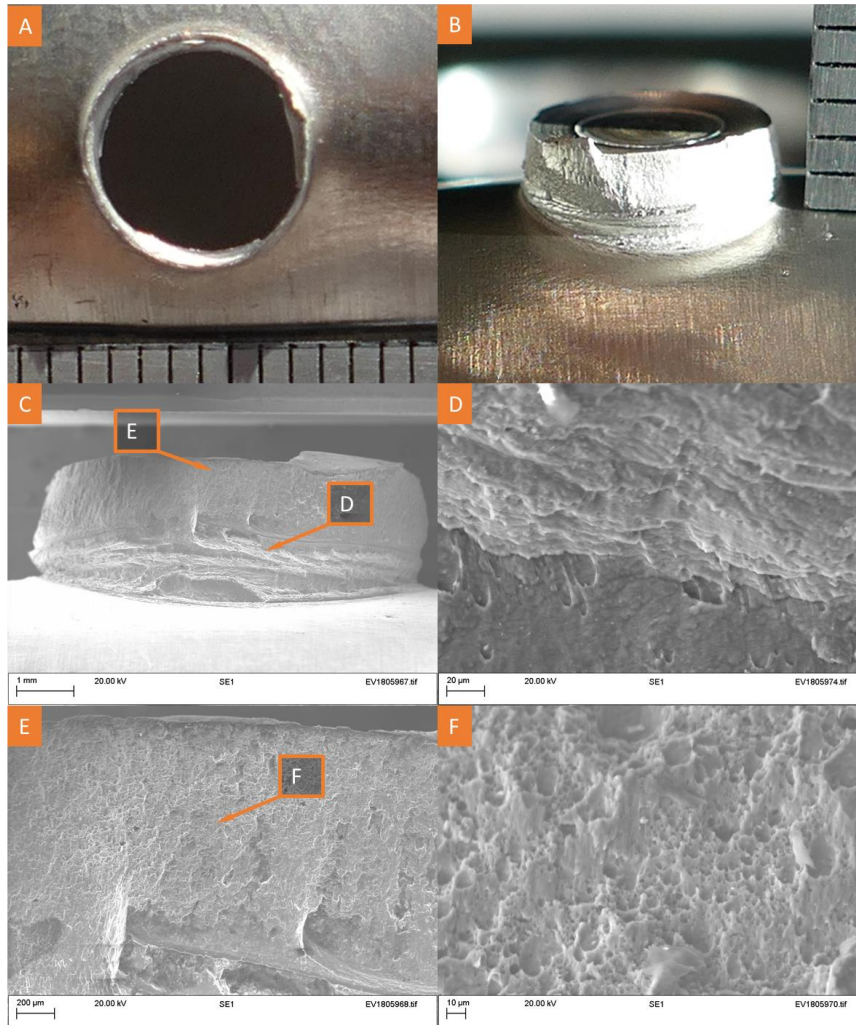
Fracture surfaces of a plug pull out top sheet failure mode of RFSSW AA5754-H24 condition W10 (RS = 1000 rev/min; PD = 1.8 mm):
